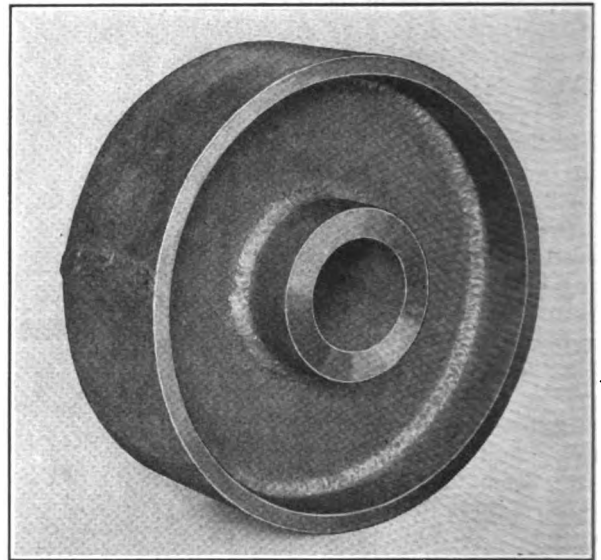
THE COMPLETED SOLENOID BRAKE WHEEL
